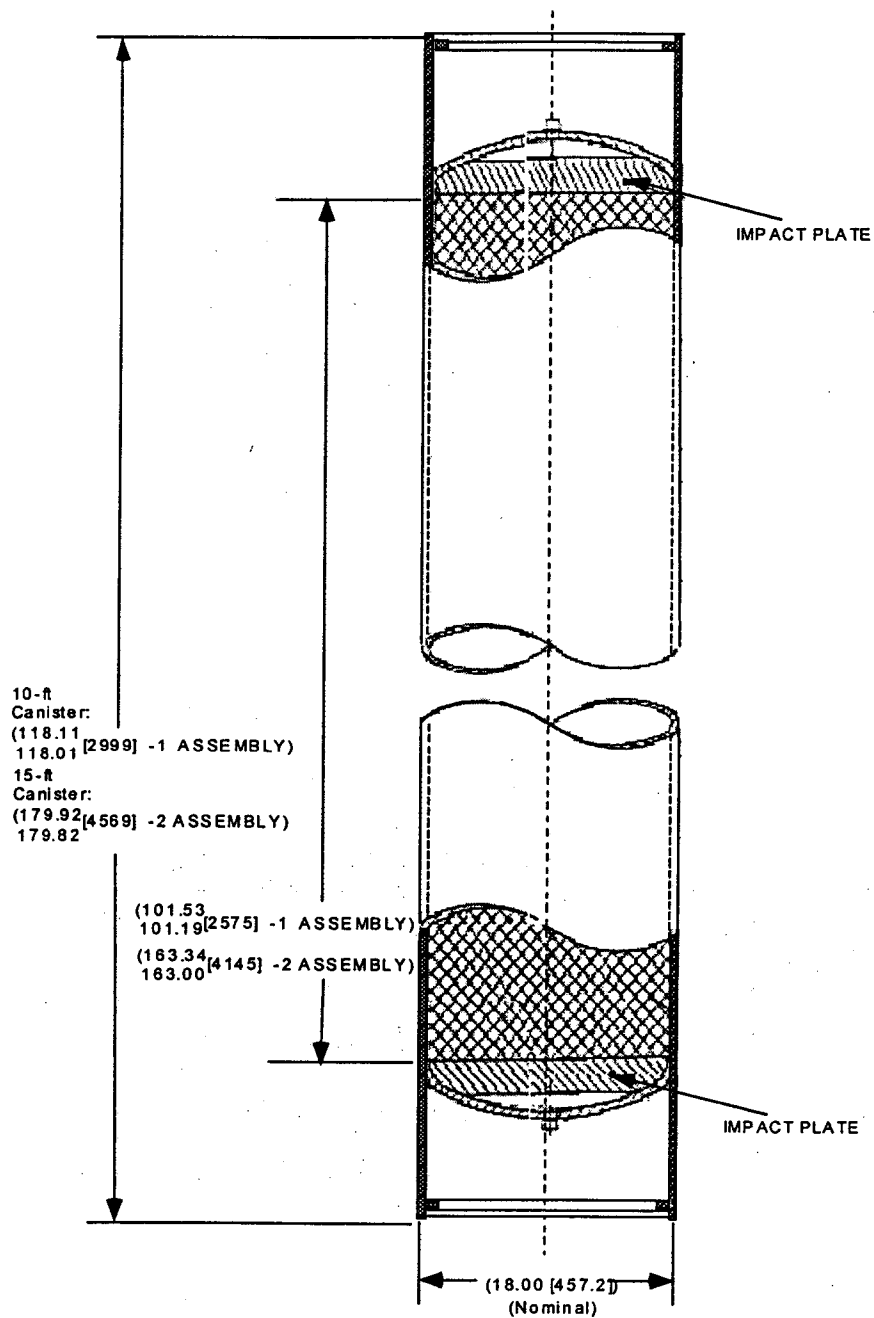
Plan View of the Proposed 18 in. DOE SNF Canister
